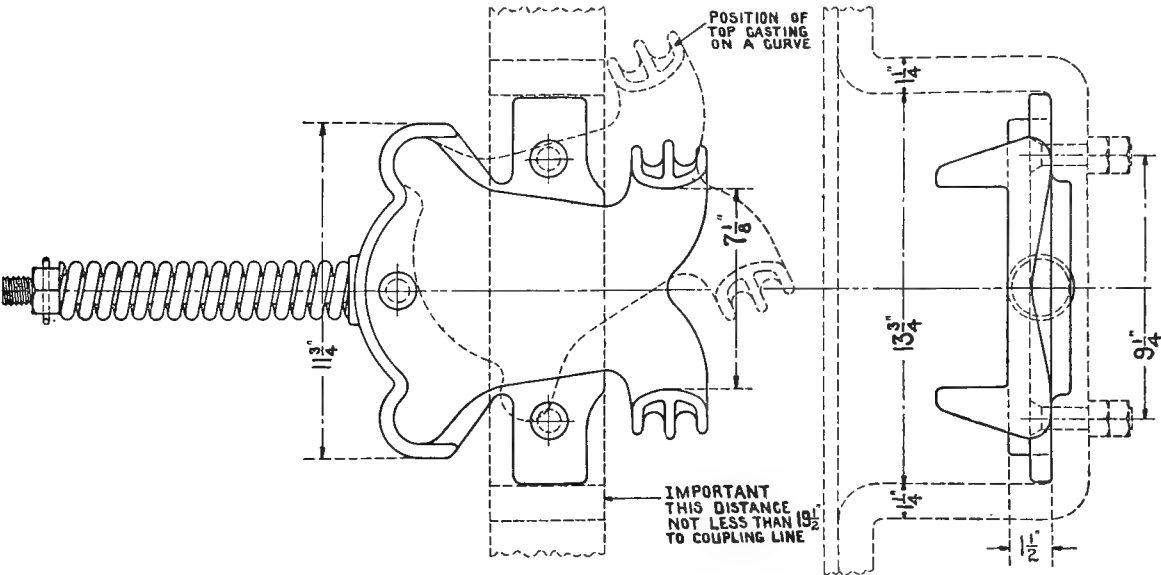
Chaffee Centering Device. Waugh Draft Gear Company.
